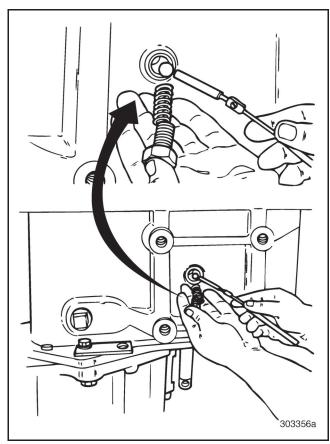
Installing Shift Fork Poppet Ball, Poppet Ball Spring and Capscrew
